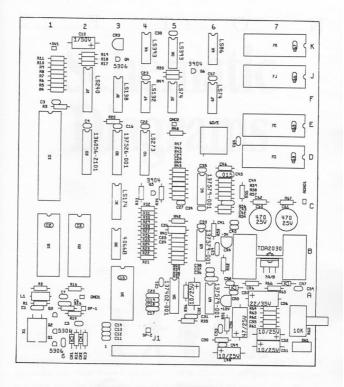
JSA Audio II PCB Assembly A047184-04 A
